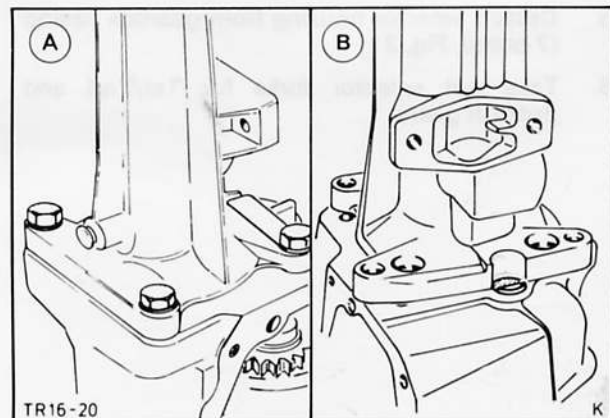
With extension housing bolts removed, turn extension housing until countershaft can be removed
